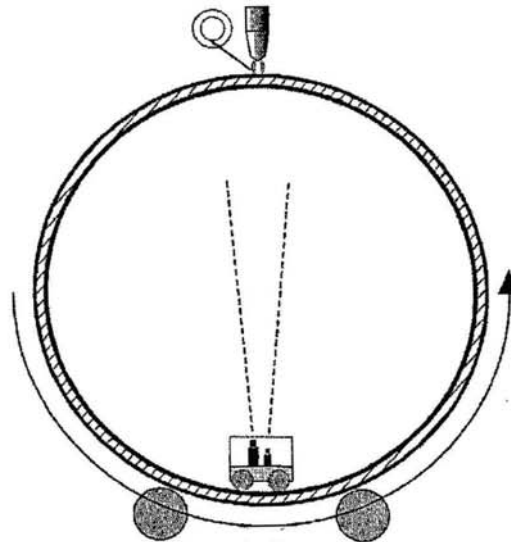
Schematic view of the submerged arc welding (SAW) process of steam generators for the nuclear industry. The welding torch (top) remains fixed while the entire generator is rotated.
